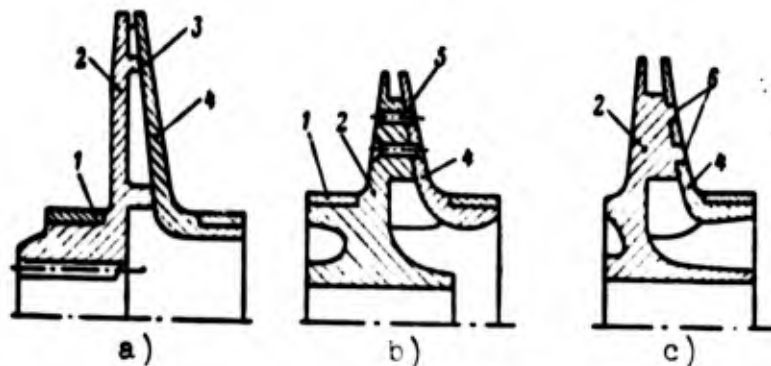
Assembled impellers of pumps of turbopump assembly: a) with brazed cover; b) with riveted joint of the cover; c) with cover joined by calking in of flanges on blades of the impeller; 1 — slit gasket ring; 2 — impeller with blades; 3 — place of soldering; 4 — cover; 5 — rivet; 6 — calked flanges.
